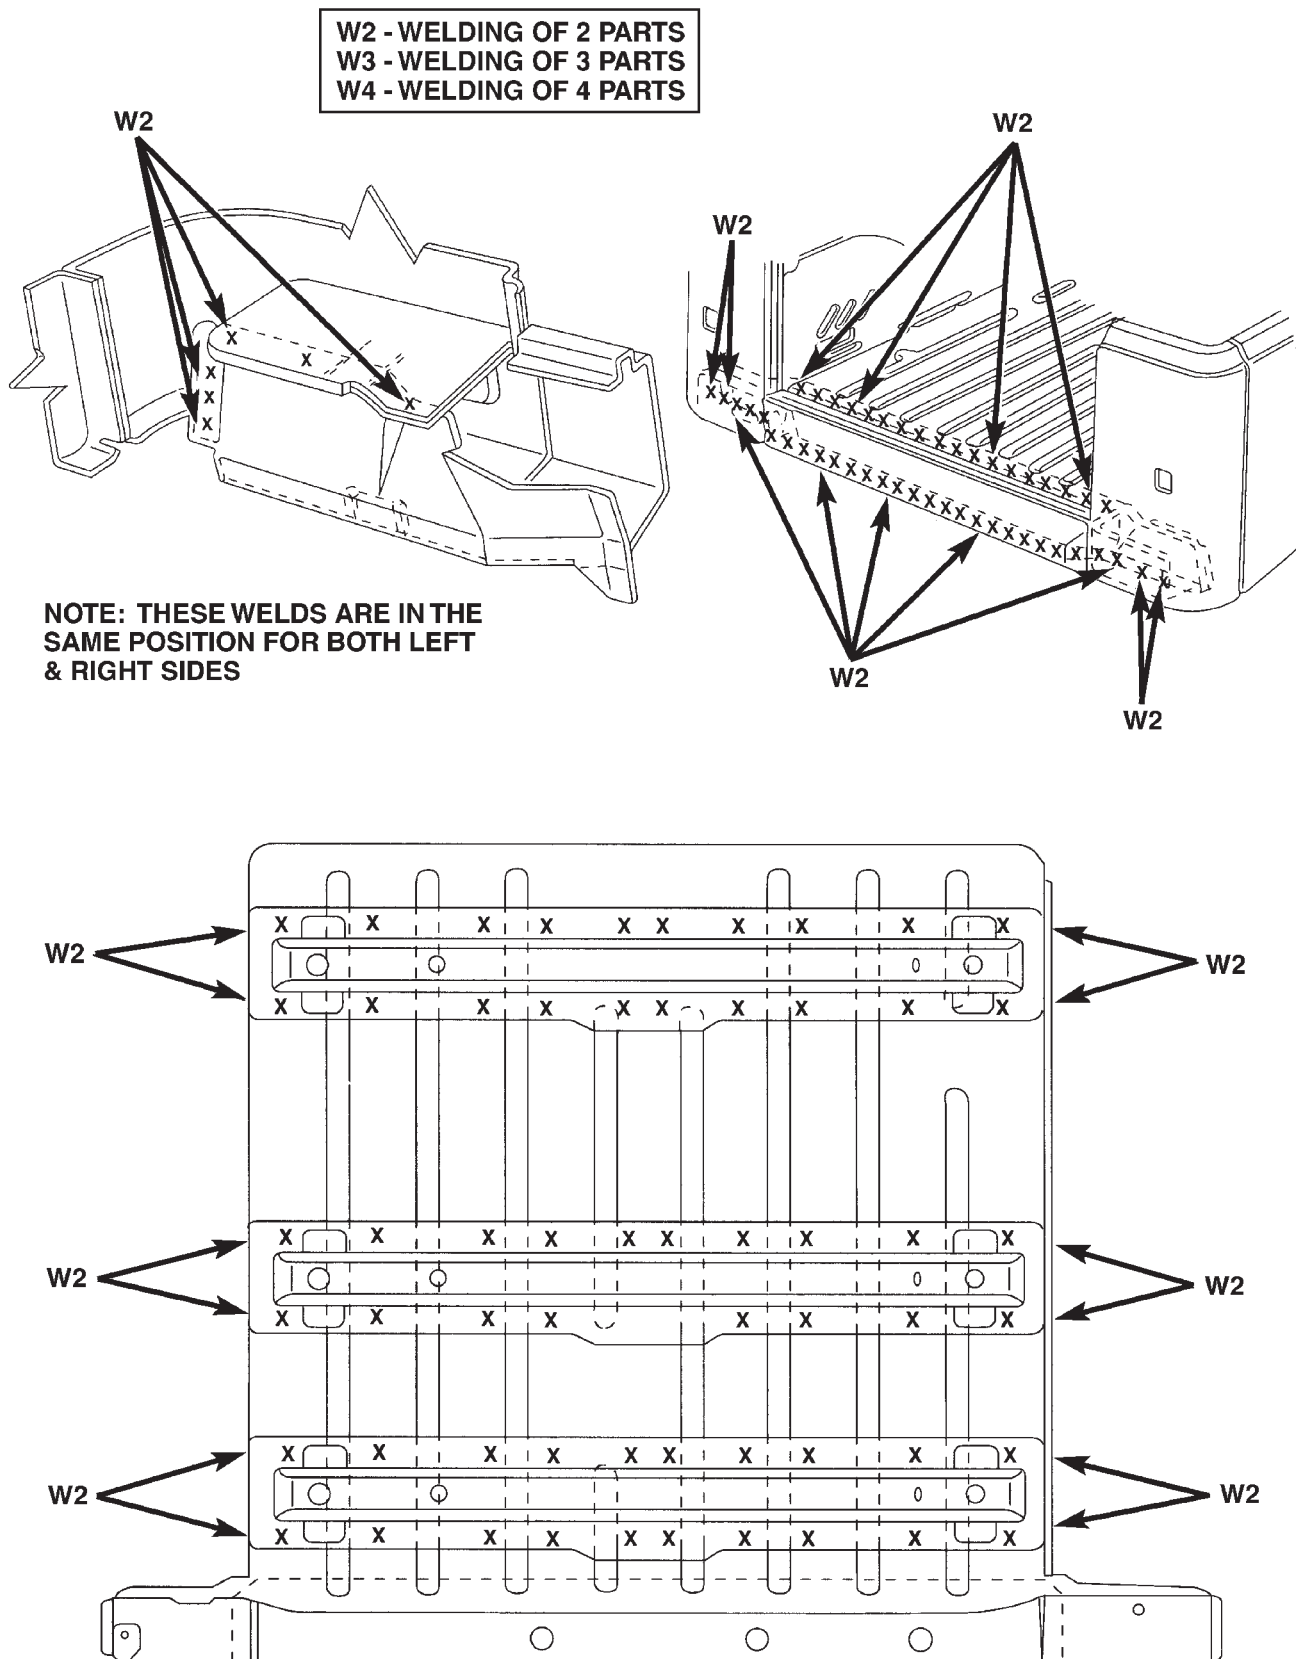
REAR FLOOR PAN AND REINFORCEMENTS
